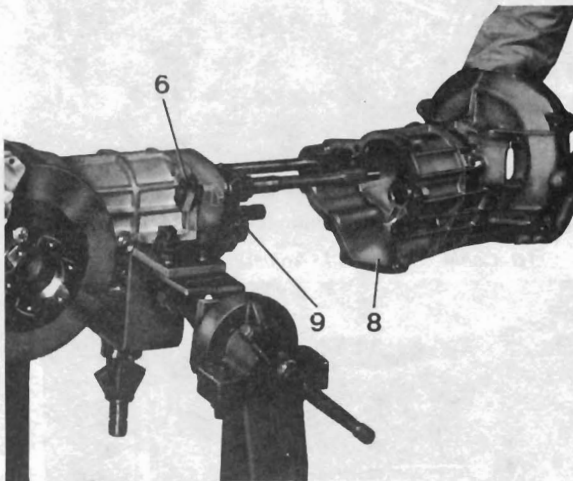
Withdrawing the gearcase/clutch housing (Sec 6)
